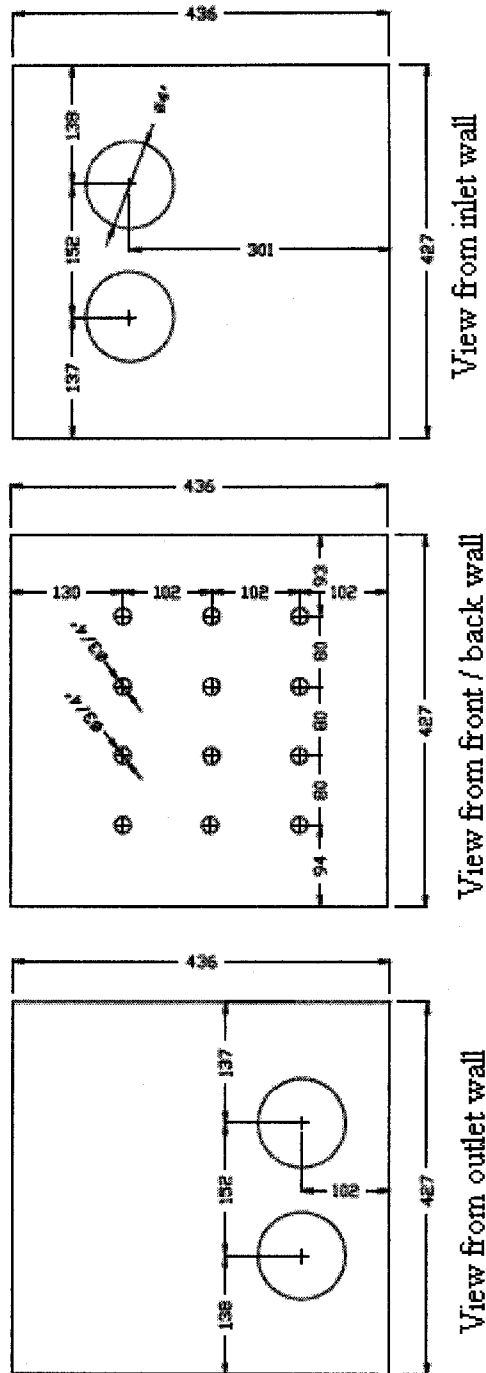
Layout of the mixing tank designed to facilitate various jet assemblies (all dimensions are in mm)
